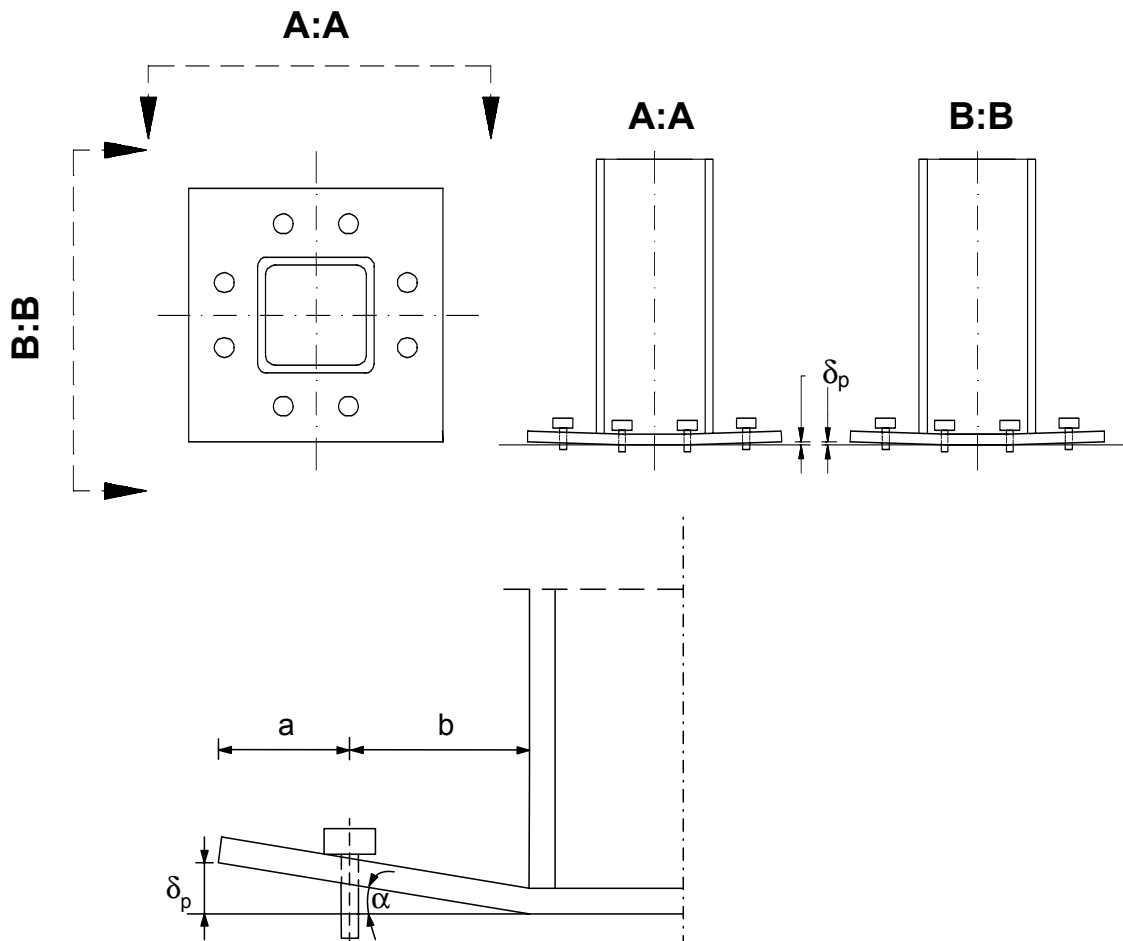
Modelled deformation in the flange-plate due to welding
